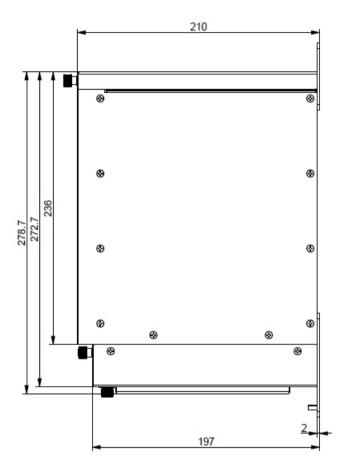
Dimensions: Right side (KBox C-101-1 with fan tray option)
